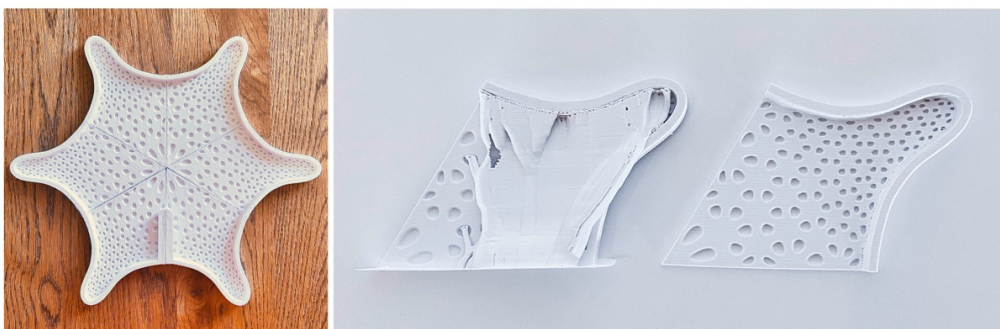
Symbiont's Mold - Bottom Part, Right Image: single part before and after removing 3D print's supports, designed and fabricated by author
